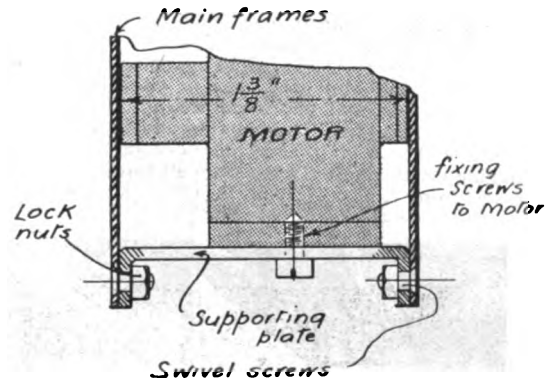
CROSS-SECTION OF FRAMES, SHOWING MOTOR, SUPPORTING PLATE, AND SWIVEL SCREWS.
